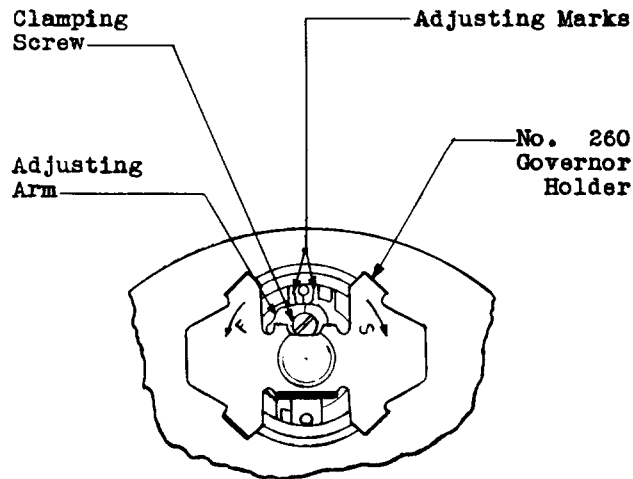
Illustrating the Position of the No. 260 Governor Holder
